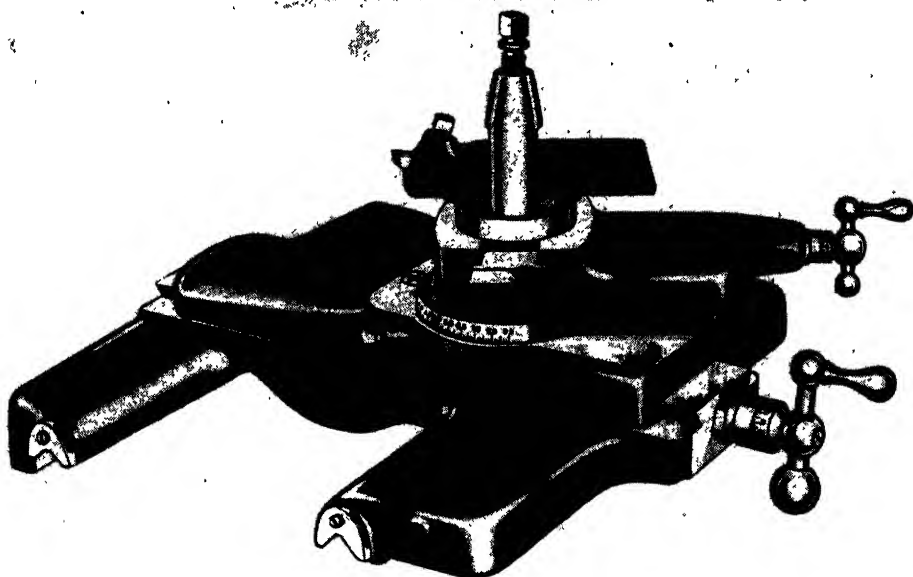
For cutting 60-deg screw threads, set the compound rest at 29 deg and adjust the depth of cut with the compound-rest feed screw. (South Bend Lathe Works)
